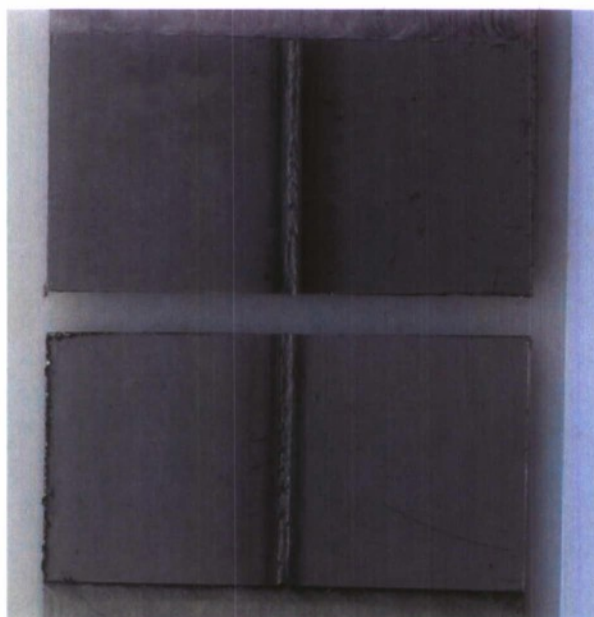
Typical Failure of Stake Weld Lap Shear Specimens
